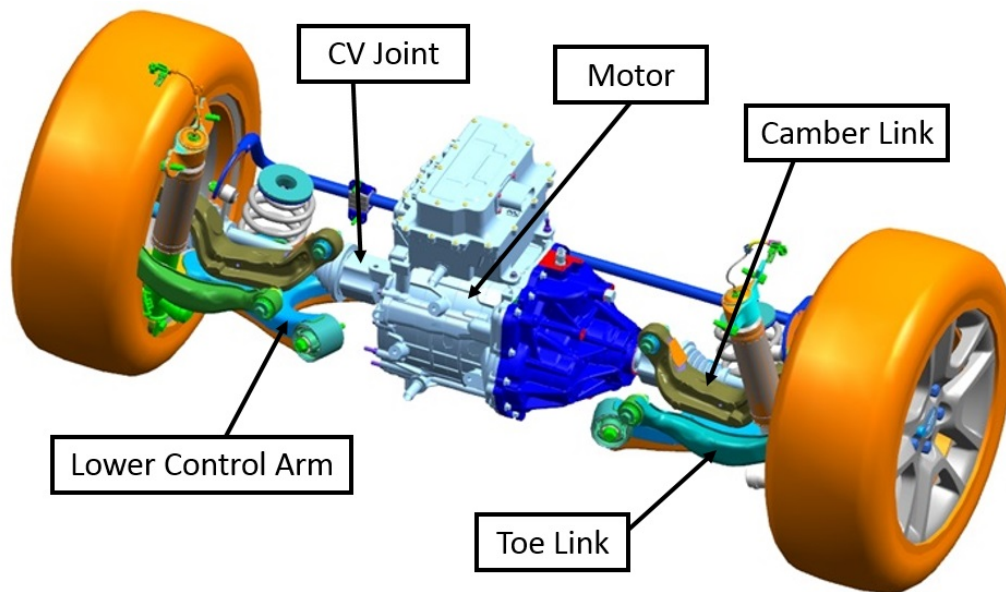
Buick LaCrosse AWD rear suspension with motor in place - front isometric view.
